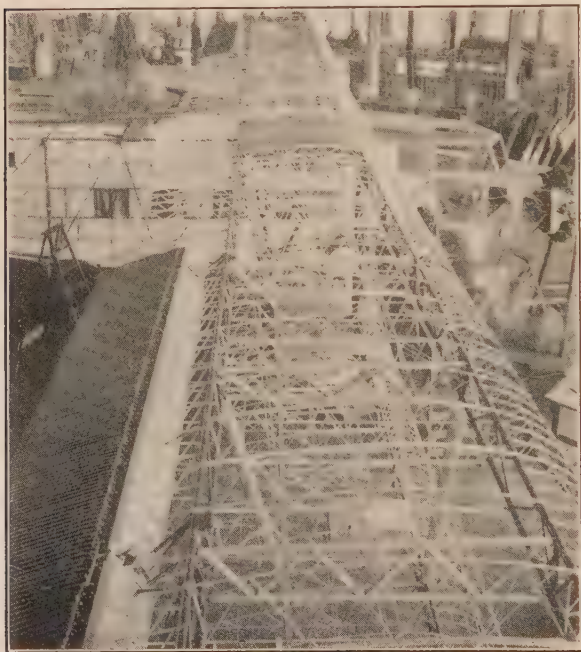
Upper wing and ailerons. (*Boeing.*)
